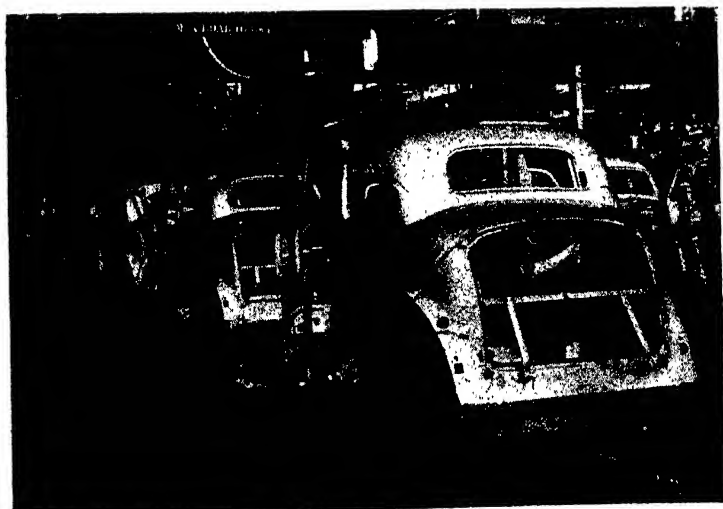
THE SPOT-WELDING SECTION ON THE FINAL ASSEMBLY LINE ("Welding")
